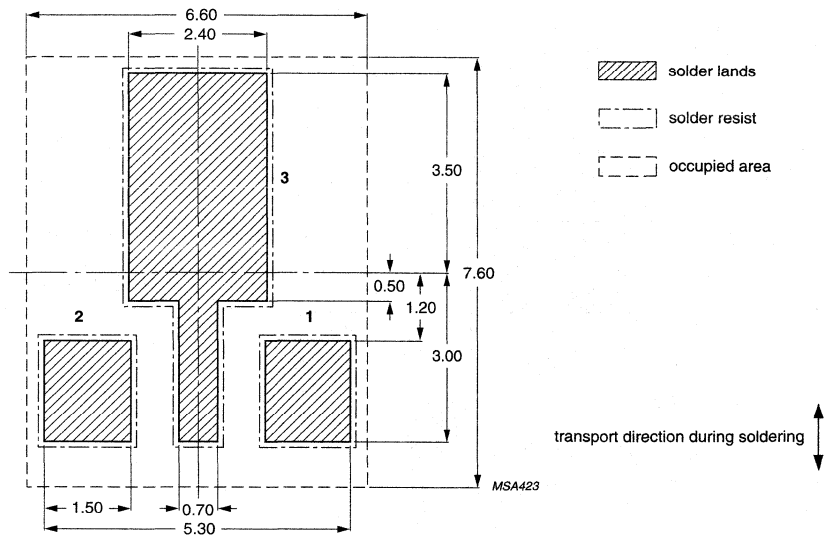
Wave soldering footprint for SOT23; typical dimensions.
